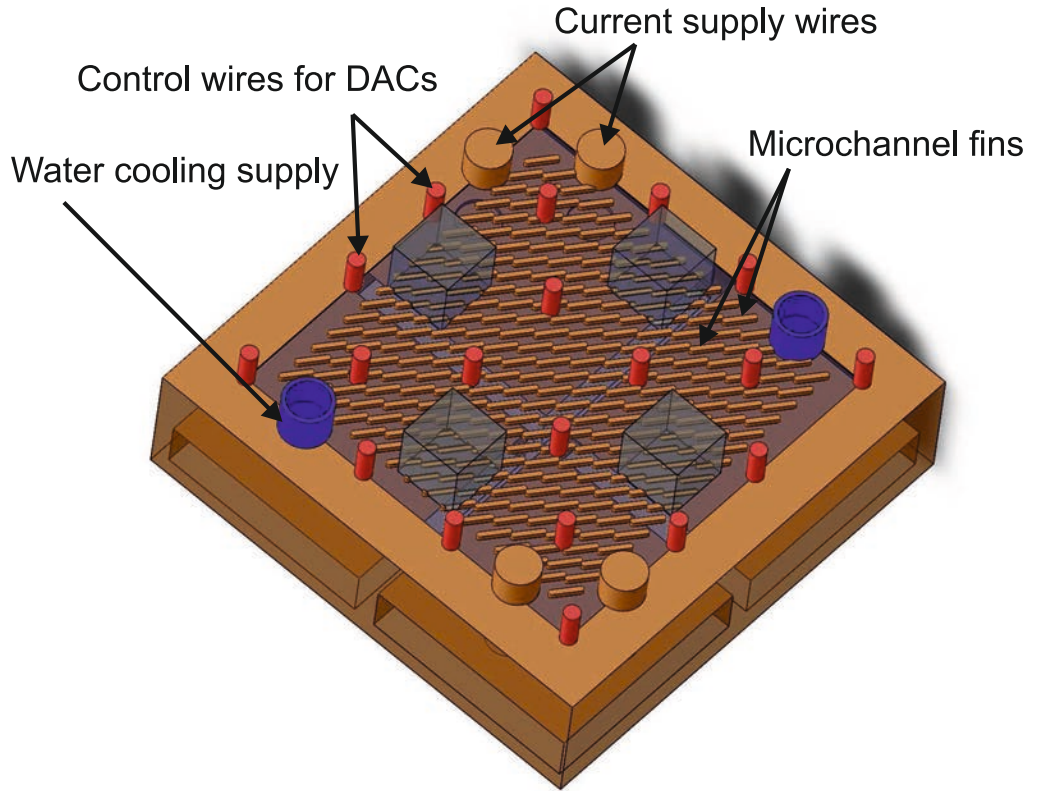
Picture of the copper heat sink with microchannel cooler. For illustration purposes the bottom plate of the heat sink is not included.
